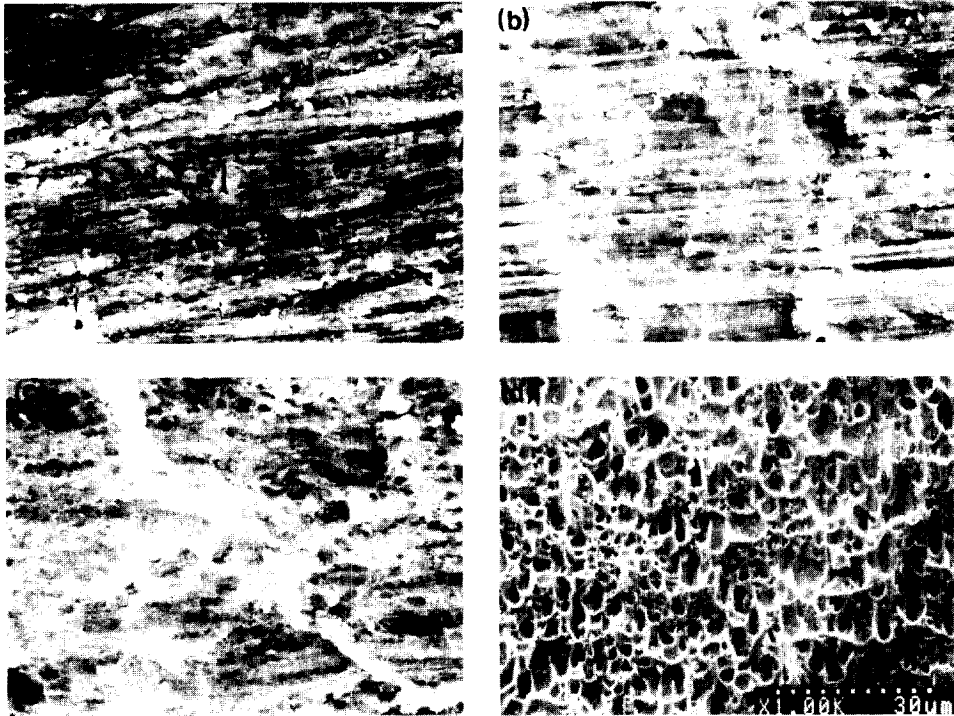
Fracture surface of bond line failure, bonded at 560°C, with 3 MPa.
